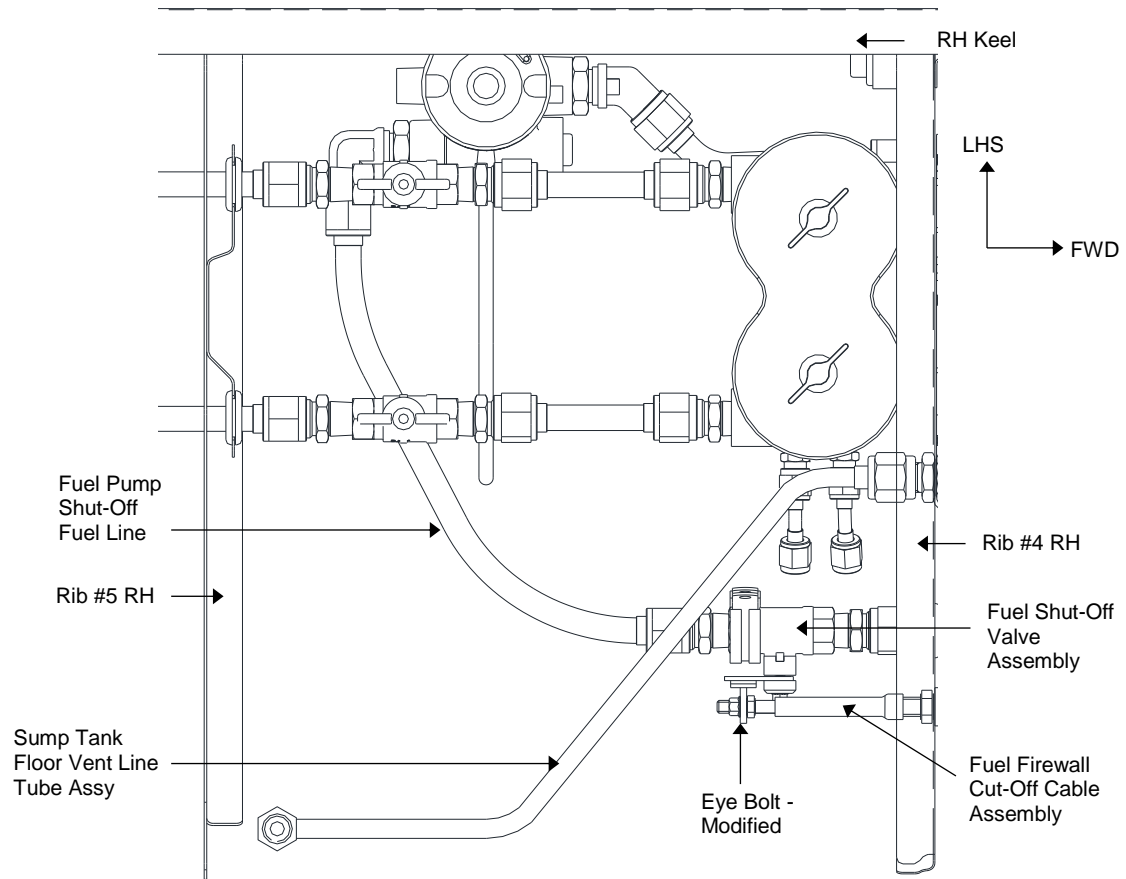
Sump Tank Floor Vent Line Tube Assy location – viewed from above (MK II fuel system shown, MK I fuel system similar, some detail is removed for clarity)
